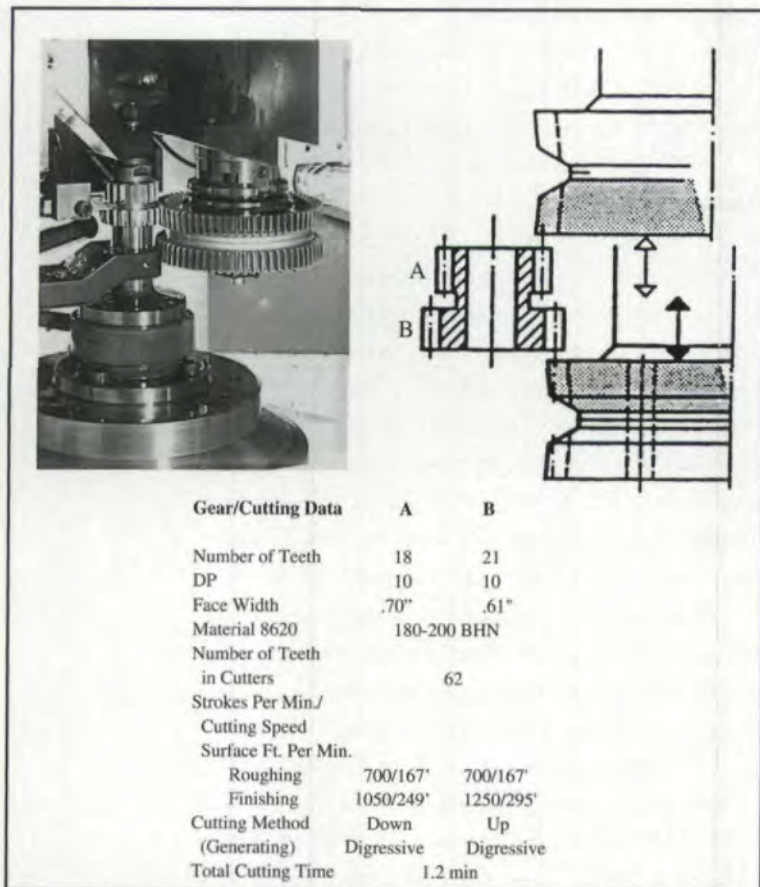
Cluster planetary pinion cutting down-and-up shaping in a single setup.
